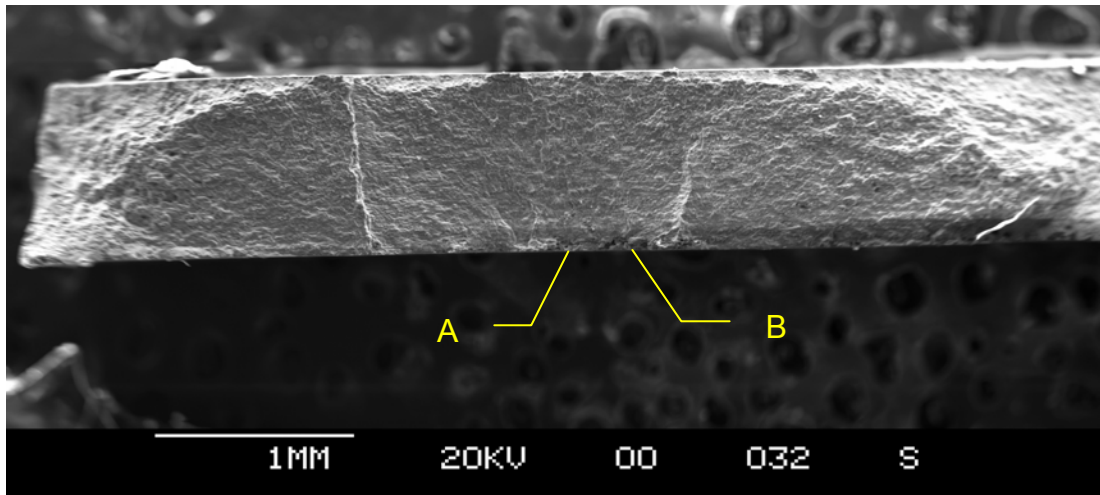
Fatigue Crack on Fracture Surface of Specimen 5877.
